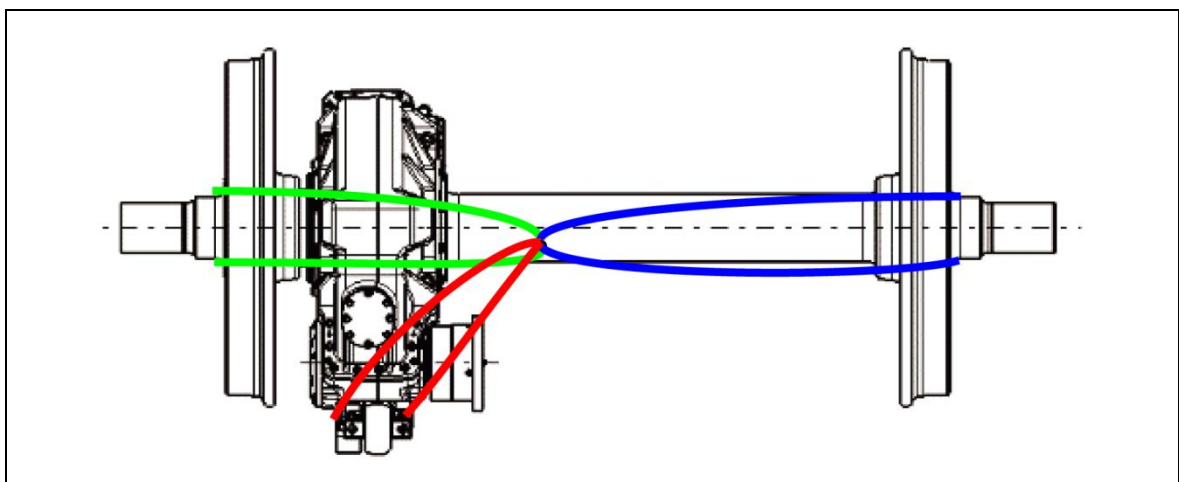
Lifting points for Traction Gearbox assembled to wheelset shaft and drive wheels
